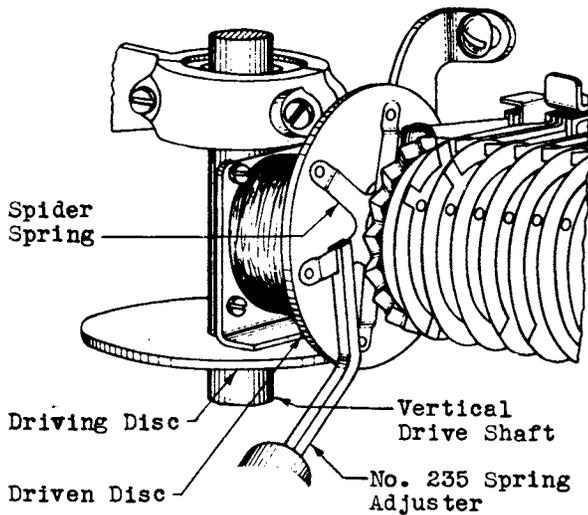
Method of Using the No. 235 Spring Adjuster to Adjust the Spider Spring
